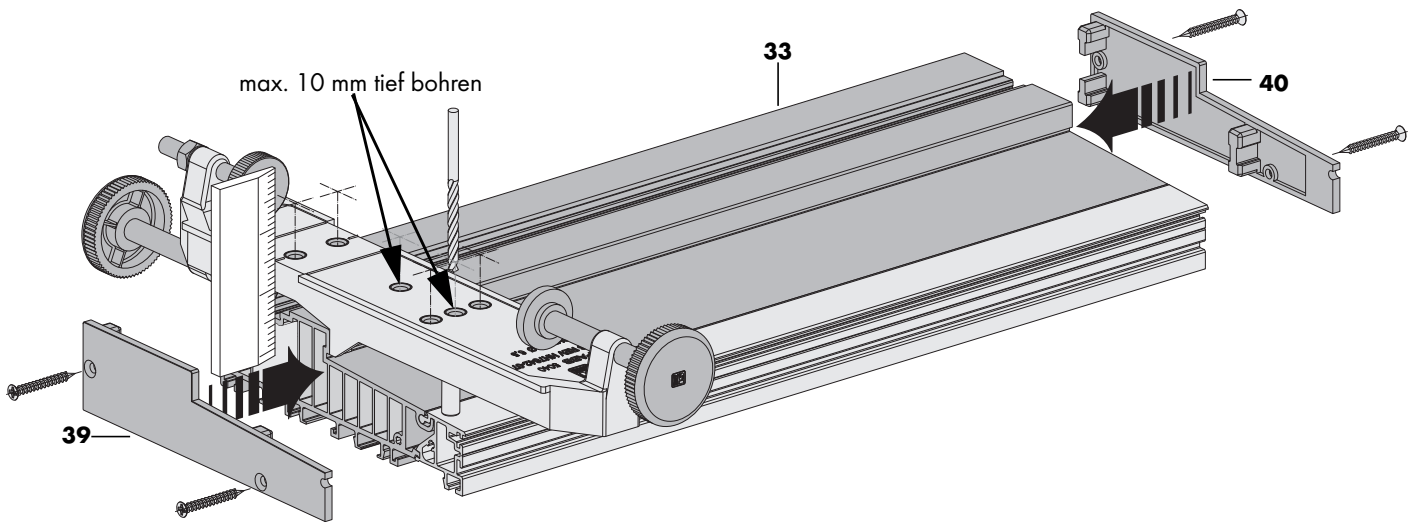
Bores for frame corner connection H EP B171 (37) and mounting of the end cap, left (39) and end cap, right (40)
